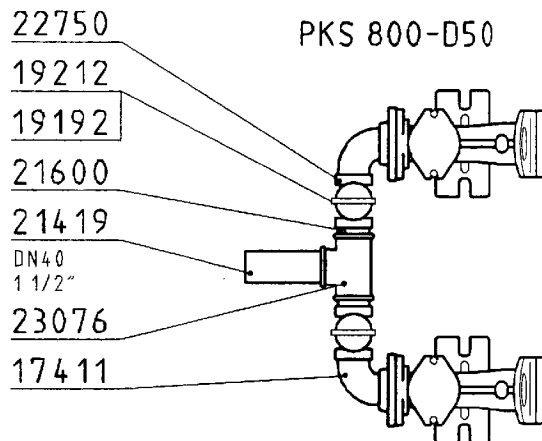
(sectional drawing PKS 800 – 50 / D 50)
